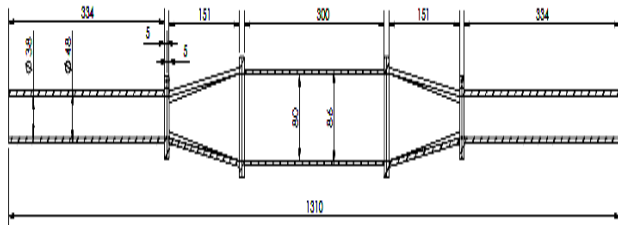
Schematic layout of exhaust heat exchanger (test section 80 × 80 × 300 mm).
